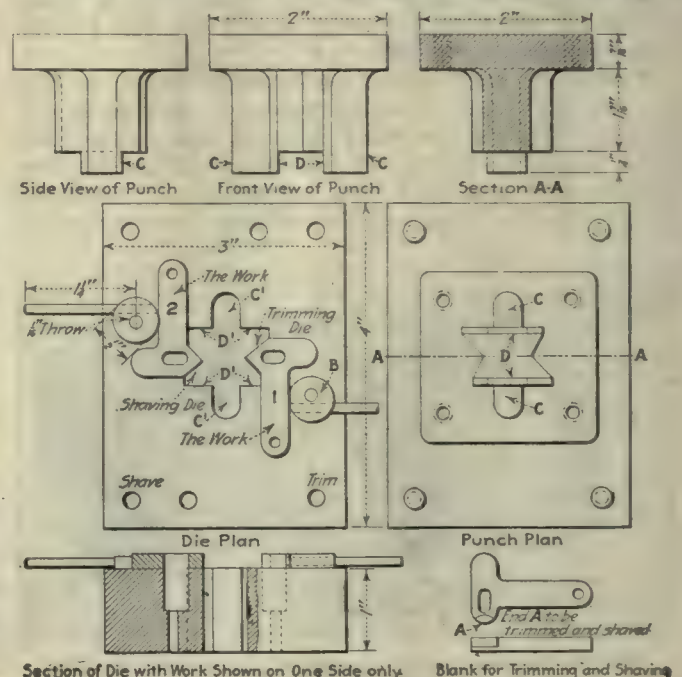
DETAILS OF TOOLS SHOWN IN FIG. 5
